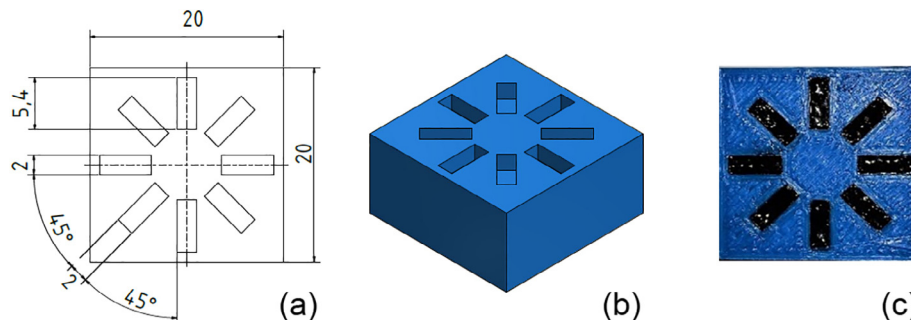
(a) Sketch and (b) 3D-CAD model of the mold and (c) printed mold with MNP-loaded-polymer filled structures.
